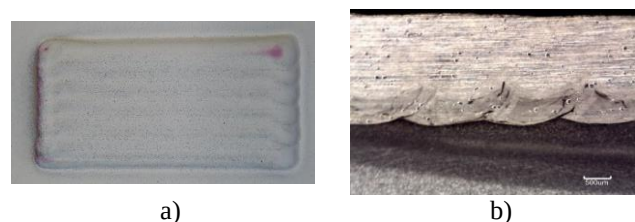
Structure of the two-layer overlay weld: a) face after penetrant tests for the presence of microcracks, b) overlay weld macrostructure; substrate – steel S355, overlay weld: 95% Stellite 6 - 5%WC
